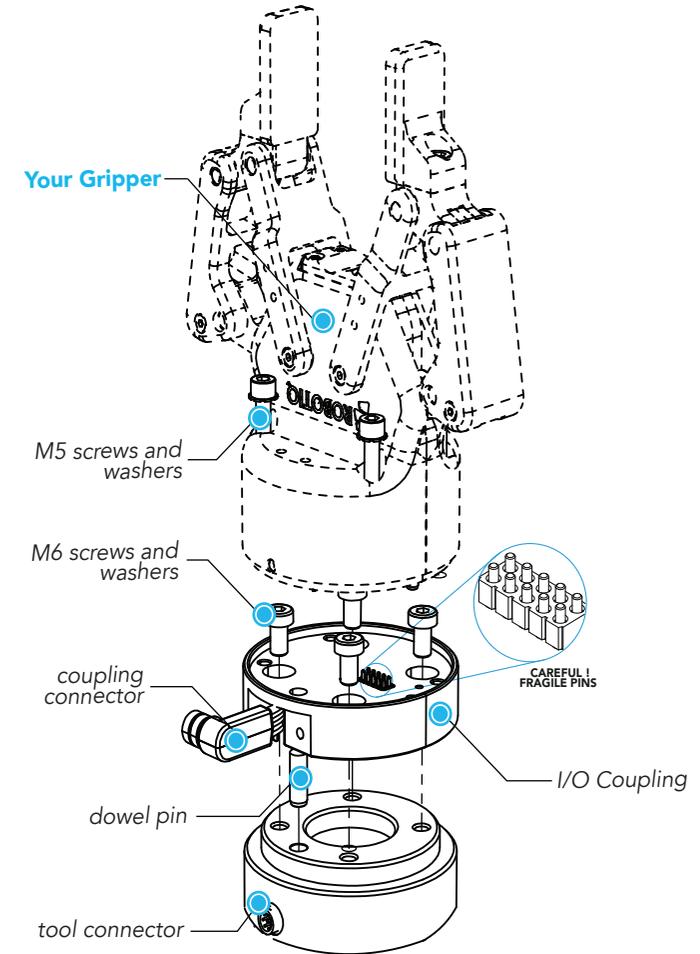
Example of the 2-Finger wrist connection kit exploded view, on robot arm.
